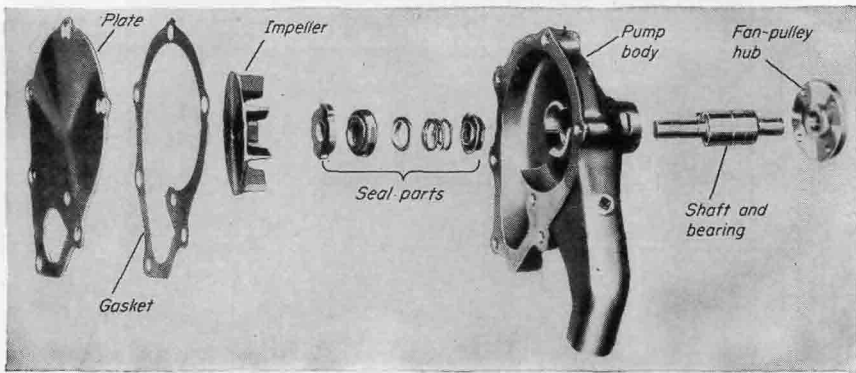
Disassembled view of water pump. (Pontiac Motor Division of General Motors Corporation)
